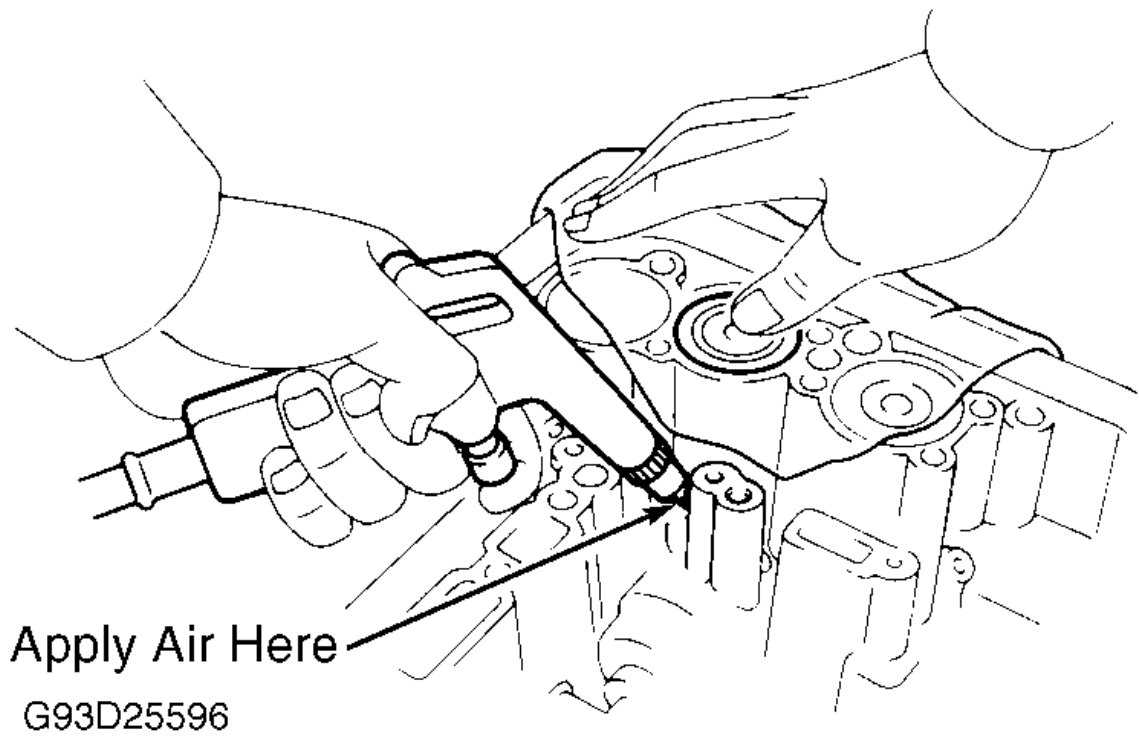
Removing Direct Clutch Accumulator Piston & Spring
